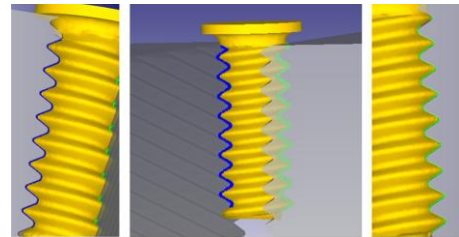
Closed views of the workpiece and tools at the end of thread rolling process
